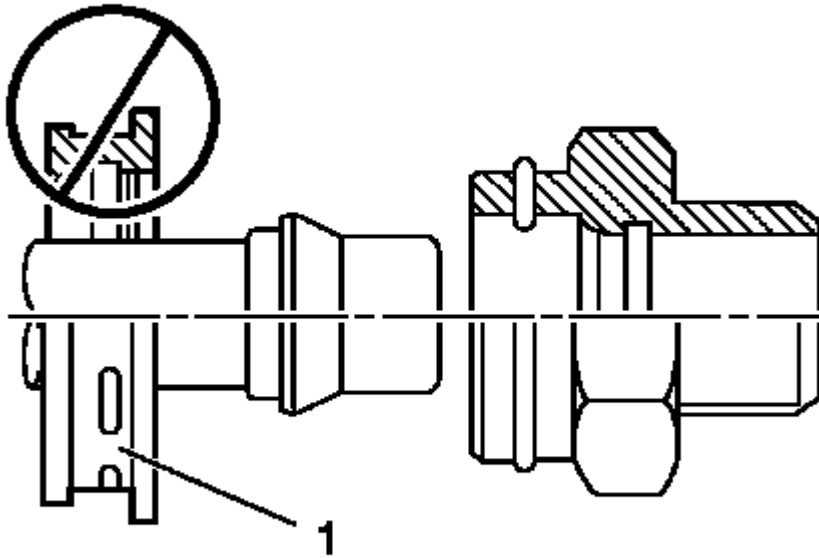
Automatic Transmission Oil Cooler Line And Fitting Caution
